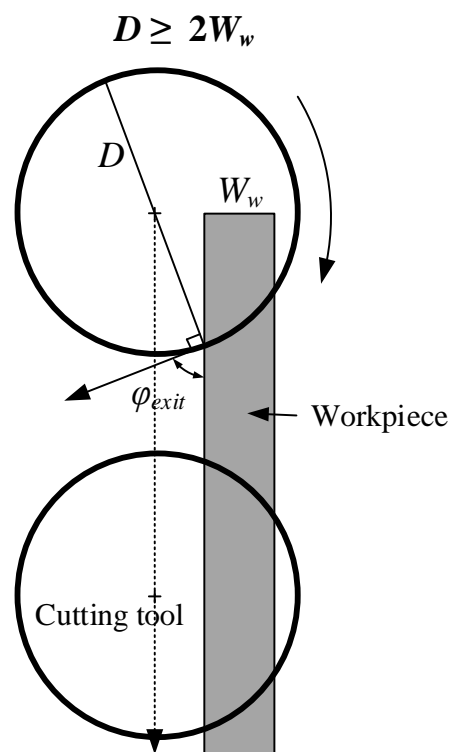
Tool path method when workpiece width is smaller than tool diameter.
